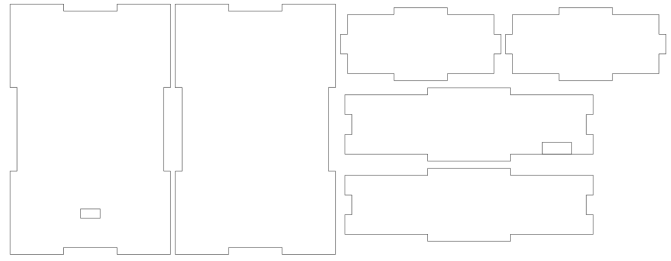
Adobe Illustrator File for Laser Cutting Lock Housing
